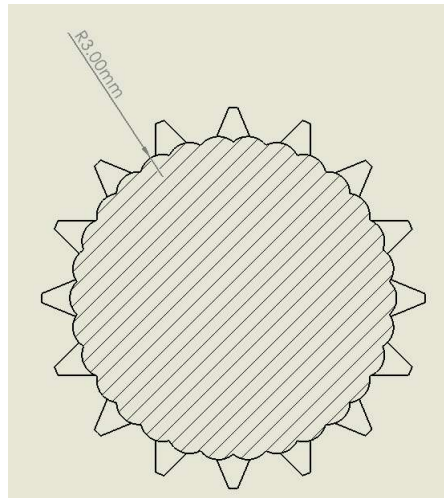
Dimensioned Cross-Section View of Roller With Horizontal Bumps
